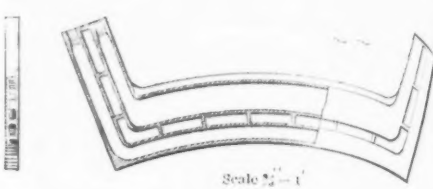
The Kennedy Bosh-Cooling Plate.
